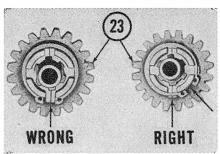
View of fourth gear, positioning pieces and snap ring (23, 24 & 25—Fig. S3-18) assembled. Split in positioning pieces and opening in snap ring should not be aligned.
